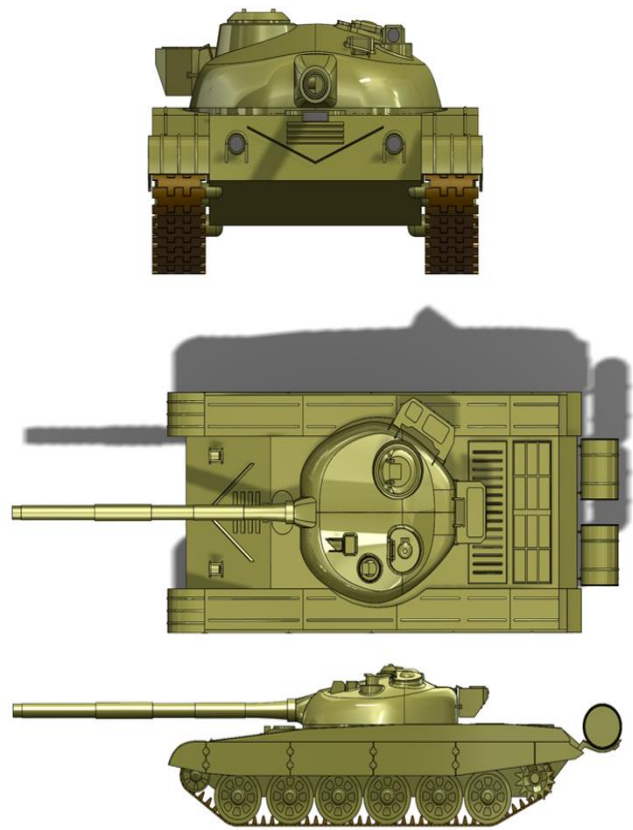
3D CAD model of SLV, Front, and Top and Side views
